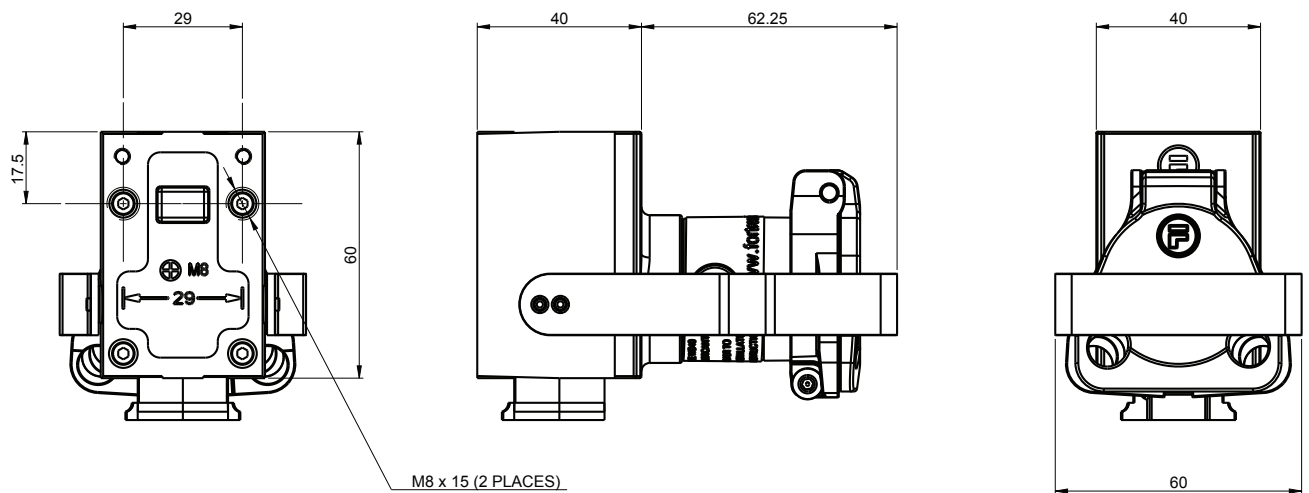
Dimensional Drawing - *proLock* with No Dustcover
